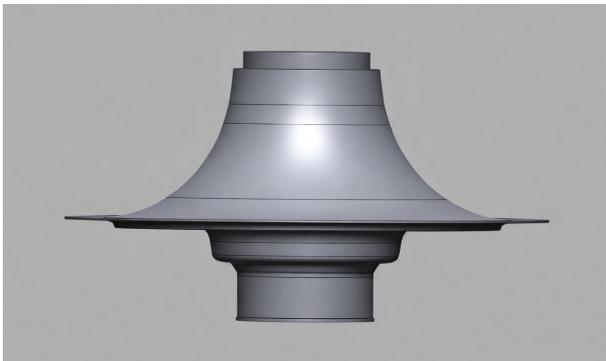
The reproduced basic geometry of the 3D model of the central part of the impeller
